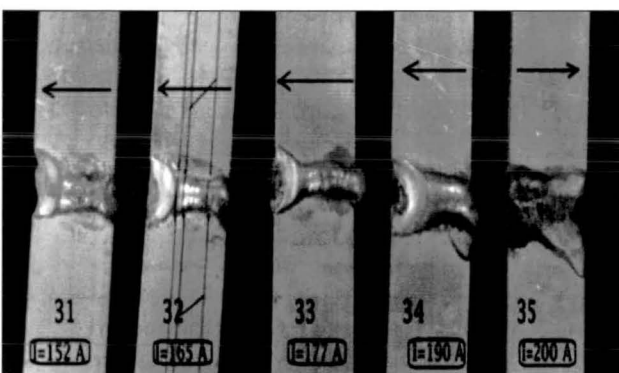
Weld beads at welding speed 150 mm/min.
